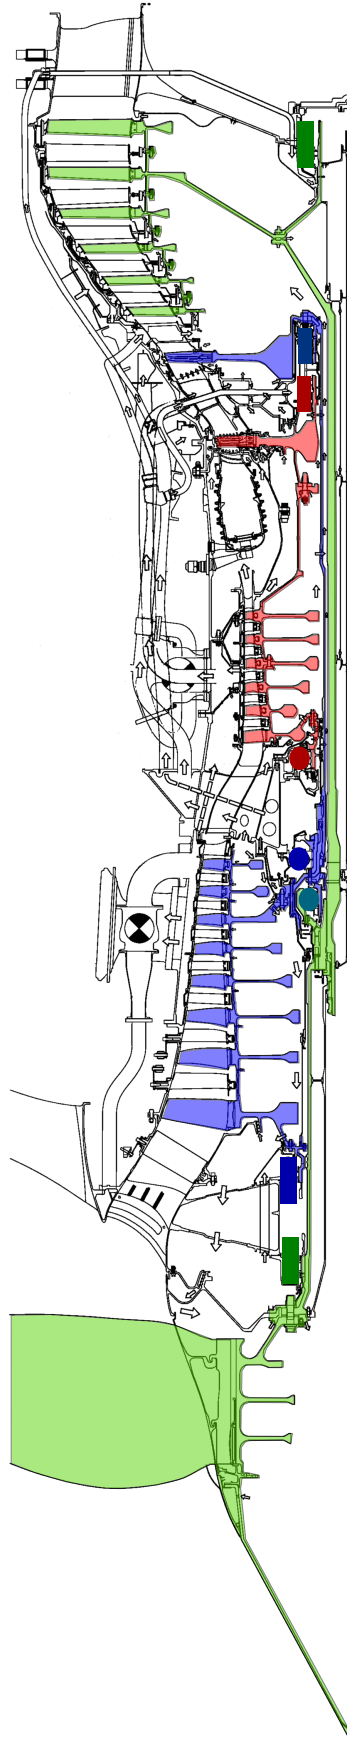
Shafts and bearings layout in a 3-spool turbofan
